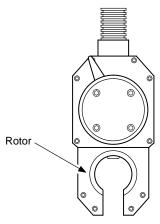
Positioning the Weld Head to View the Rotor Rotation
